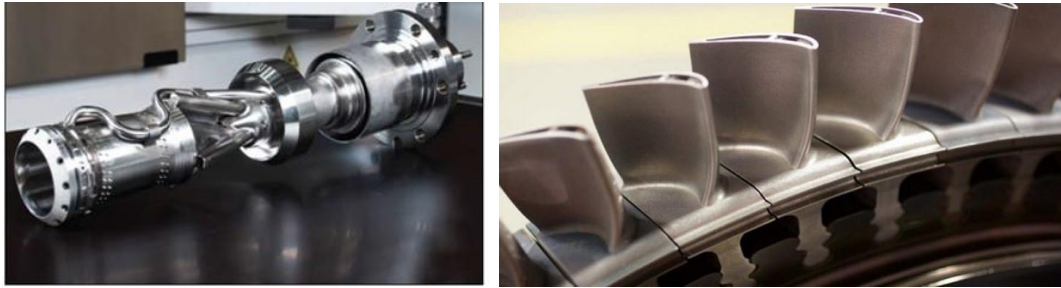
a) SGT-700/800 burners were traditionally manufactured with 13 components and 18 welds, b) turbine blade (Source: Siemens)
